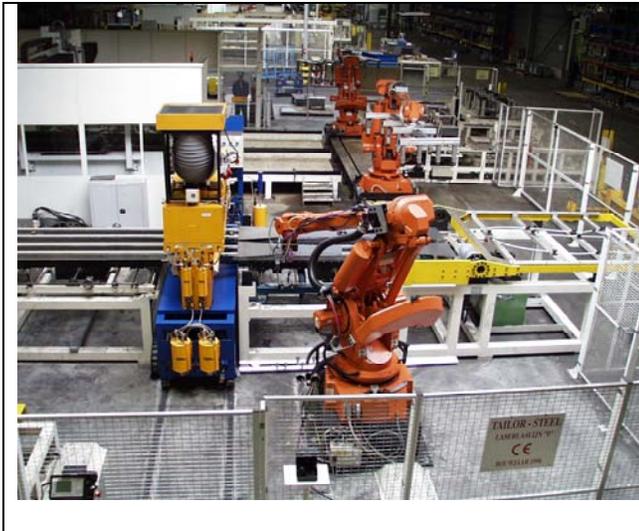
Laser Welding line at ARCELOR MTB
